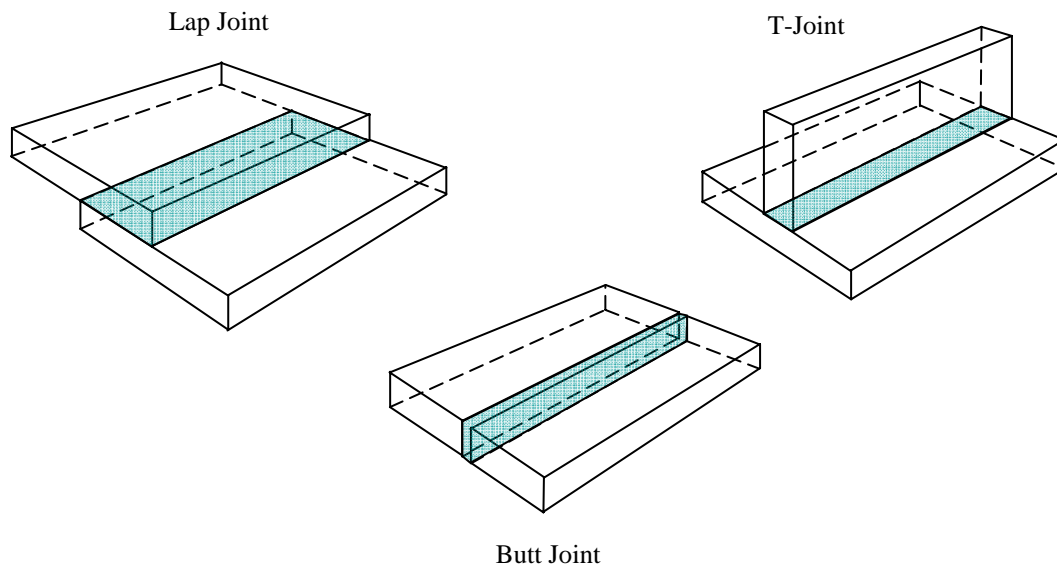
Weld joints possible using friction stir-welding
